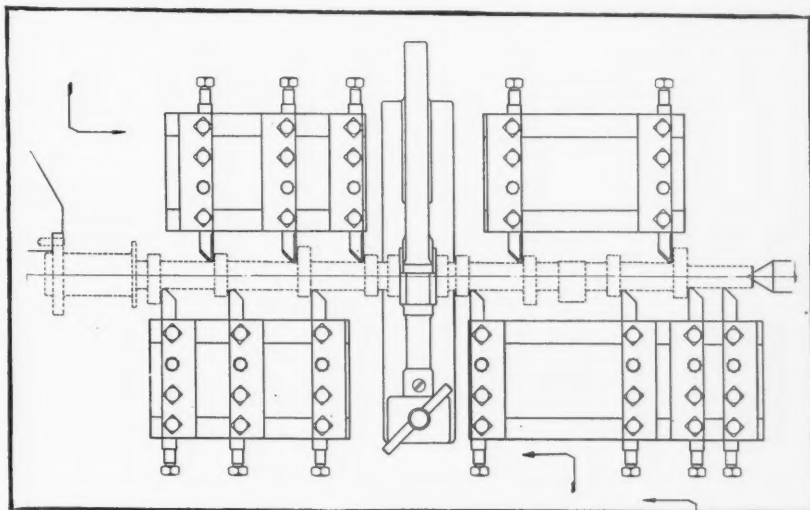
Turning the Camshaft, the Cuts being divided between Tools in the Front and Rear Holders
